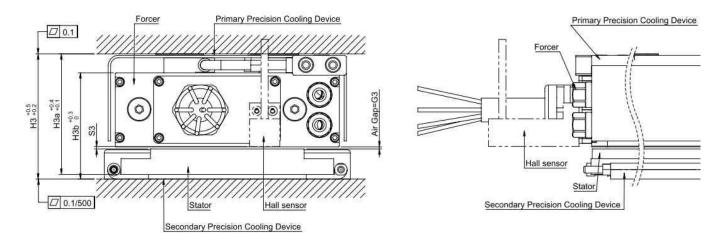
LMFP precision water-cooling linear motor assembly
